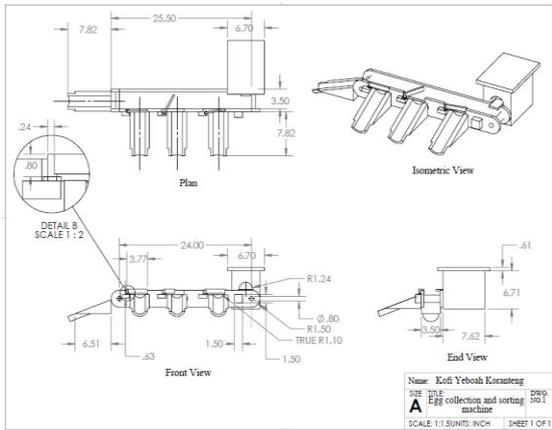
Third Angle of Projection and Dimensions of the Designed Model
